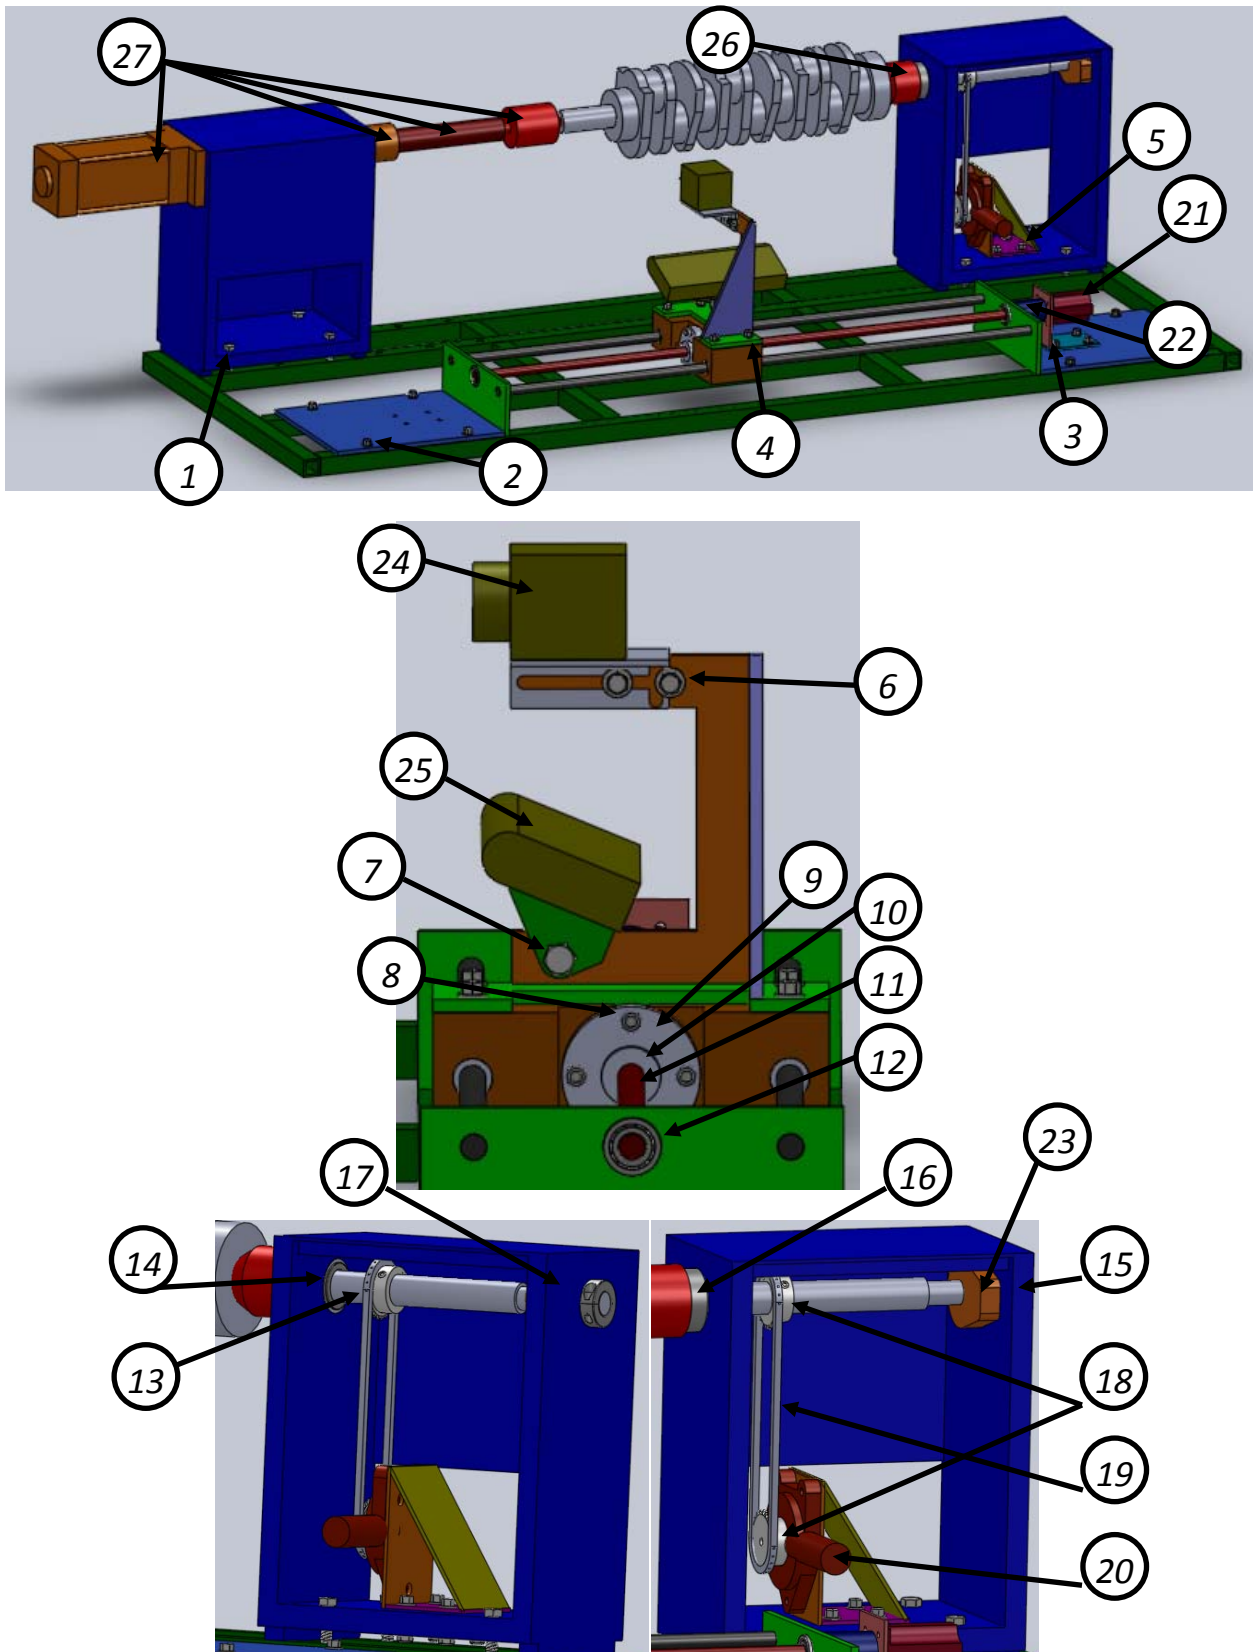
Top: Complete Isometric View showing purchased components. Middle: Camera/Light Assembly showing purchased components. Bottom: Driver Stand showing purchased components.
